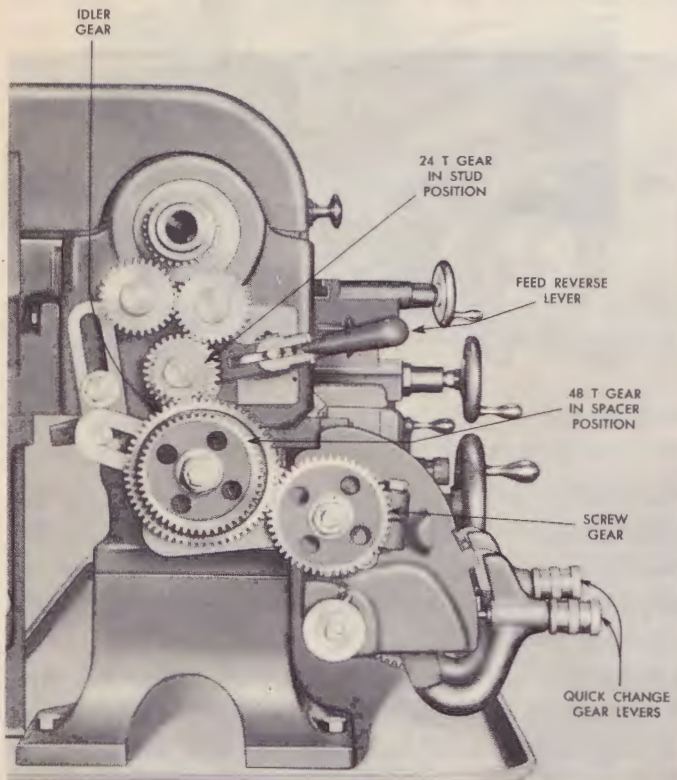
CHANGE GEAR TRAIN ON LOGAN QUICK CHANGE GEAR LATHE
